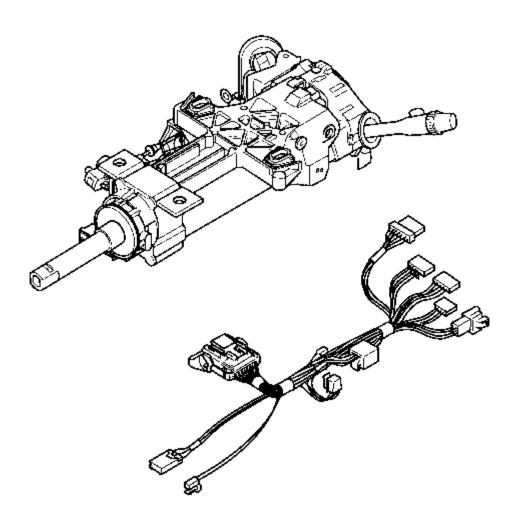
View Of Steering Column And Wire Harness Assembly Courtesy of GENERAL MOTORS CORP.
